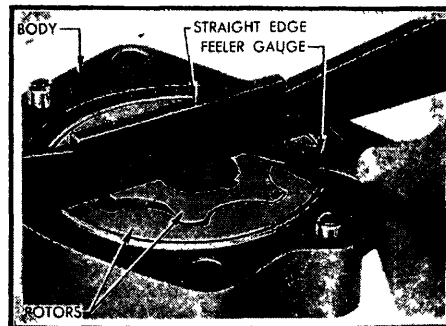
Checking side clearance of rotors in body of Eaton pump
